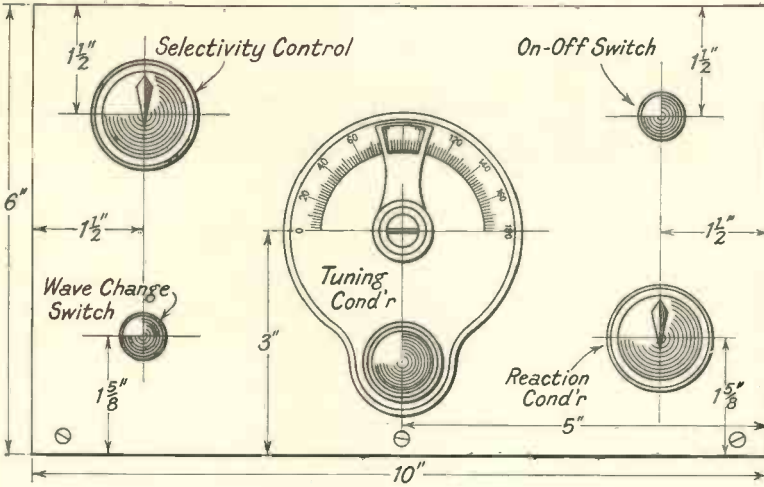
SHOWING THE LAYOUT OF THE FRONT PANEL.
